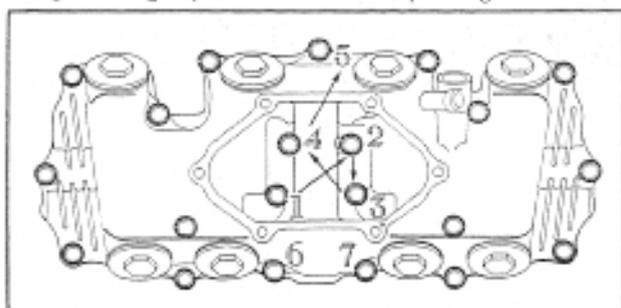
Tightening sequence of cylinder head cover bolts
